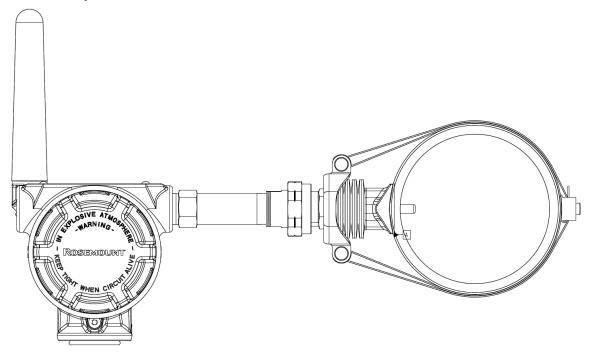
Pipe Clamp Sensor Assembly with Rosemount Connection Head
